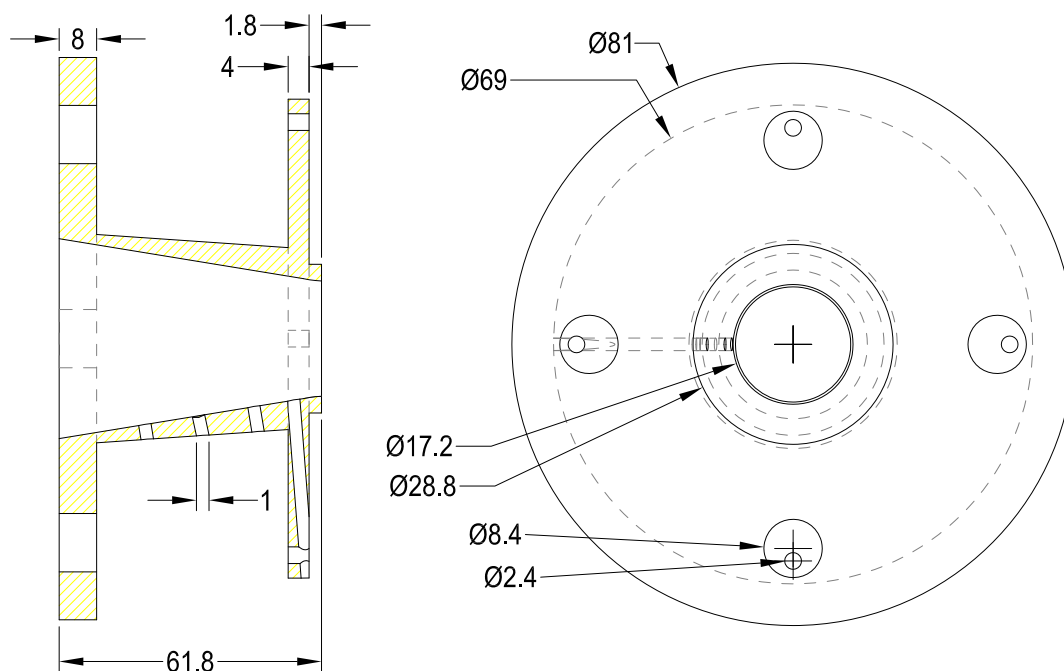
Profile of front view and section of side view of the entrainment section with main dimensions (all dimensions in mm).
